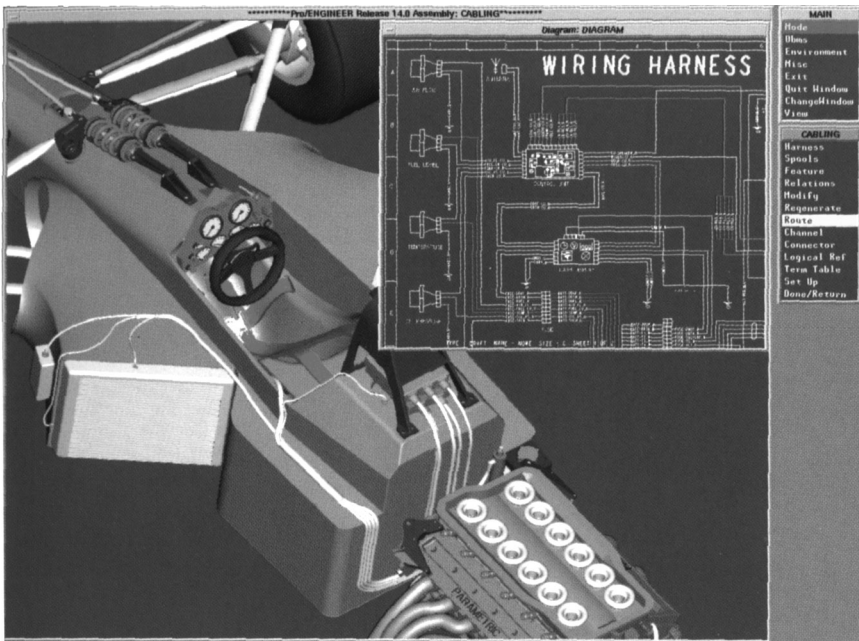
2D Design of a Wiring Harness. (Pro/DIAGRAM System, PTC) and Parametric Cable Layout in the 3D Assembly. (Pro/CABLING, PTC) Reprinted by permission of PTC.
